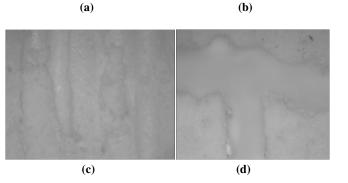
(a) & (b) Surface defects with internal crack. (c) & (d) surface crack in investment due to low sand content. Fig.8 (a) and shows the deposition of investment in to the layer of 3D printed object due to errors caused by the FFF printer which leads to decrease in surface finish of the object.
